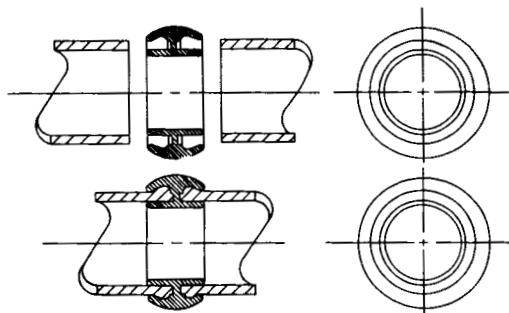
Pipe connection using boltless method (ref. 45).
